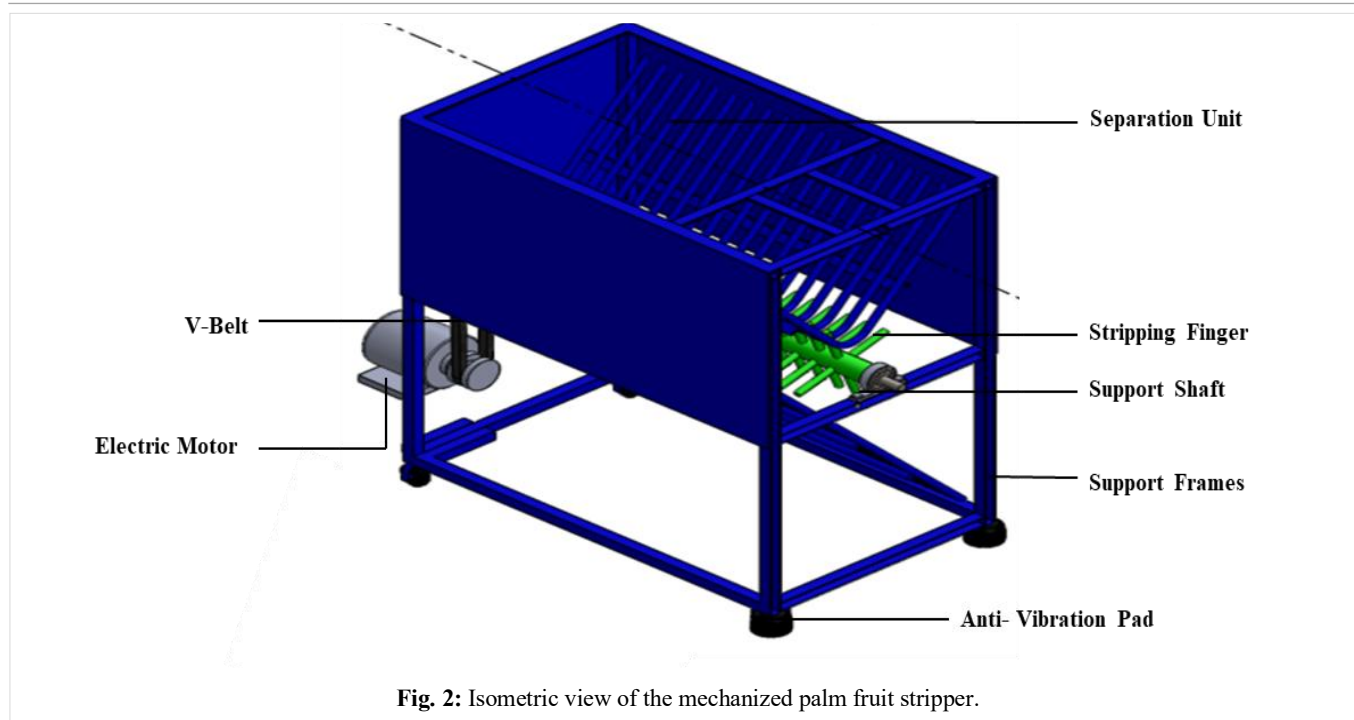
Isometric view of the mechanized palm fruit stripper.
